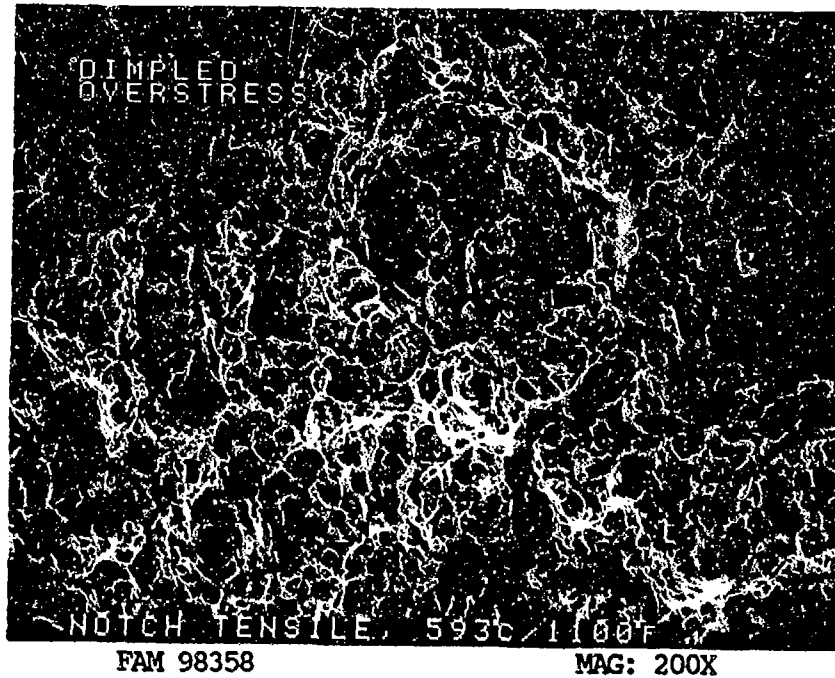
Equiaxed dimpled overstress in the primary fracture area. The fracture has a slightly intergranular appearance.
